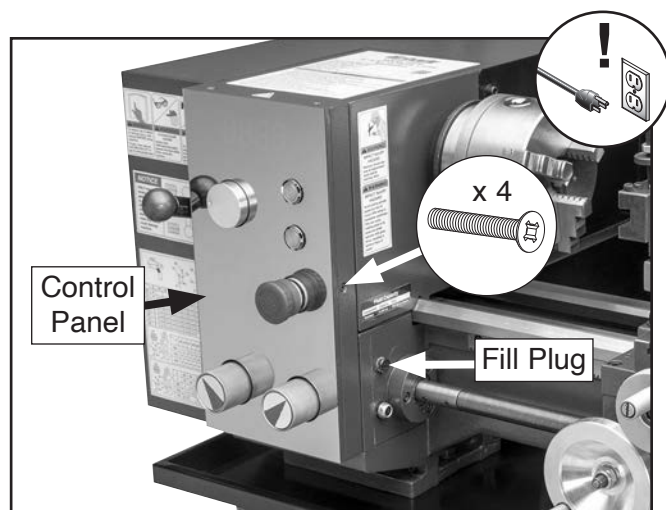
Location of gearbox oil fill plug, control panel, and control panel screws.
